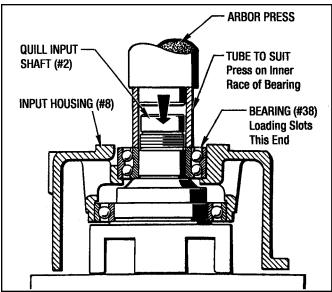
Pressing Bearing (#38) on Output Shaft
